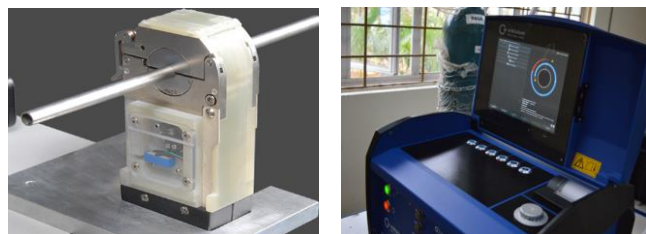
Chucks holding ss pipes Fig 2.Orbital Welding Machine
